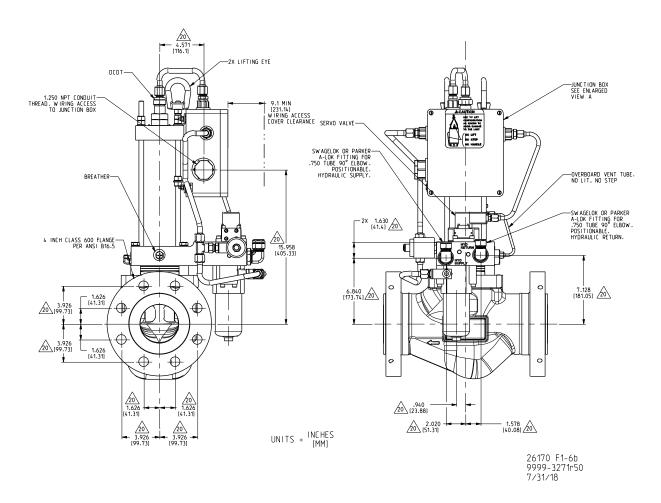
Outline Drawing, 4" Gas Fuel Throttle Valve (Low-pressure, Class 600 Version, Actuator Rotated 180-Degrees)
